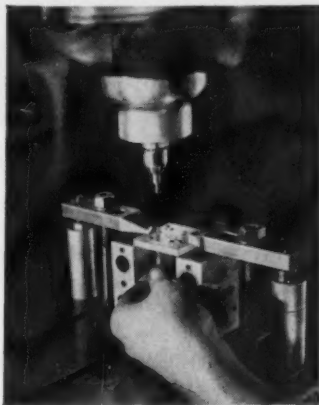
Workpiece is mounted high enough to permit measuring bottom as well as top of hole.
